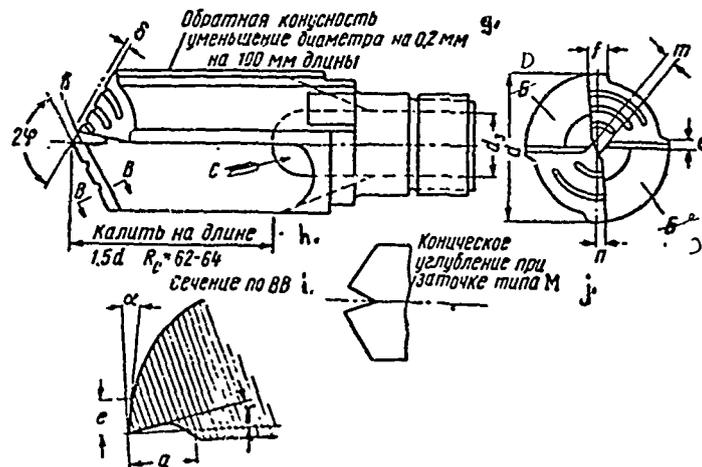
Two-sided cutting drill with two cutting edges and internal shavings exhaust
